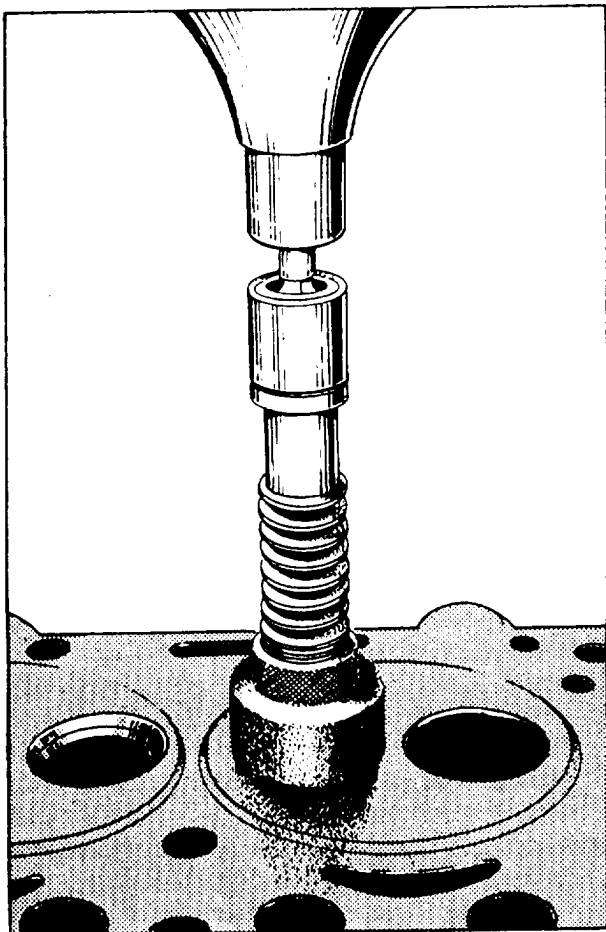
Grinding valve seats using a concentric type of grinder.
